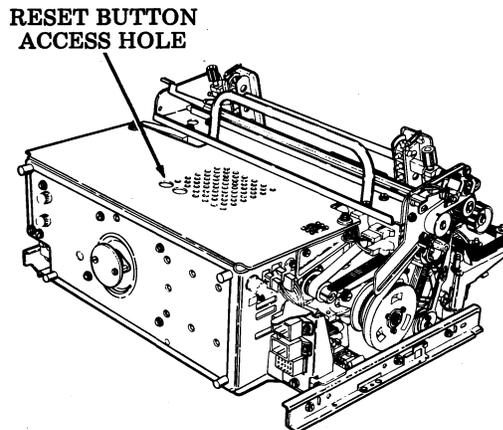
Reset Button Access Hole (Tractor Feed Printer)
